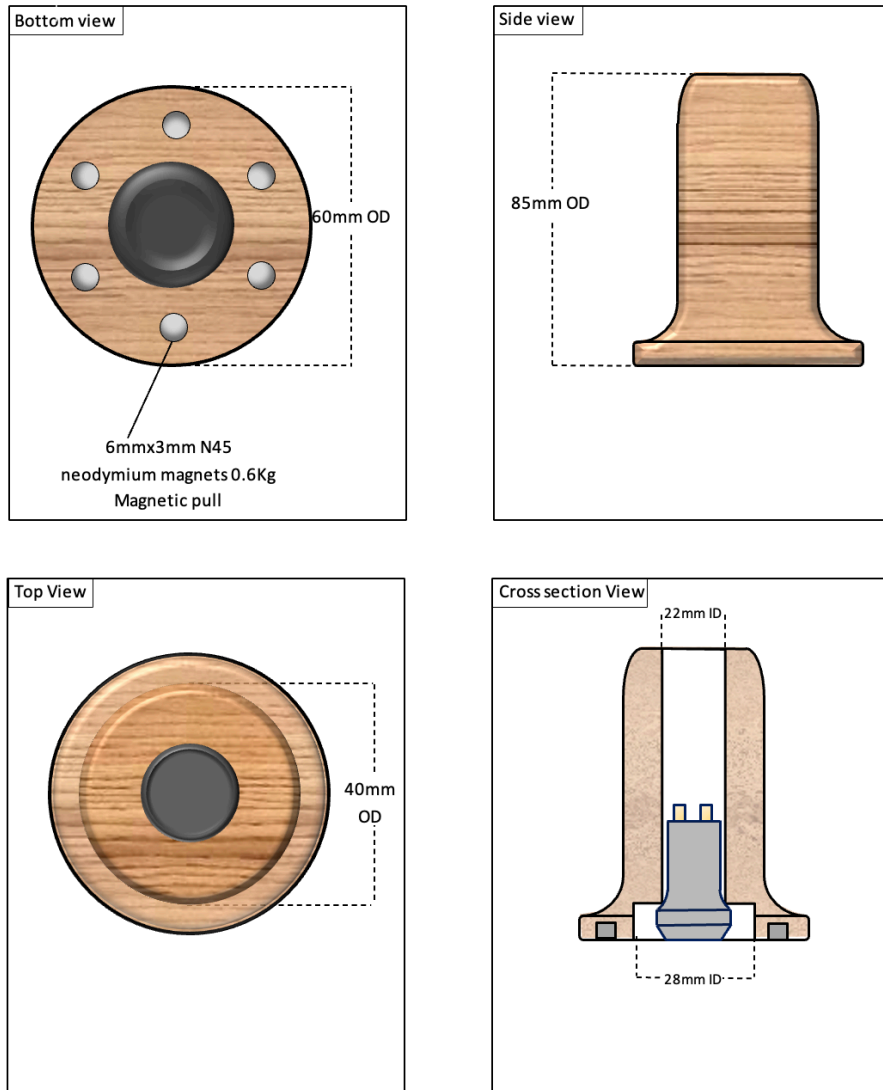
Magnetic probe coupler design for proof-of-concept drawing
